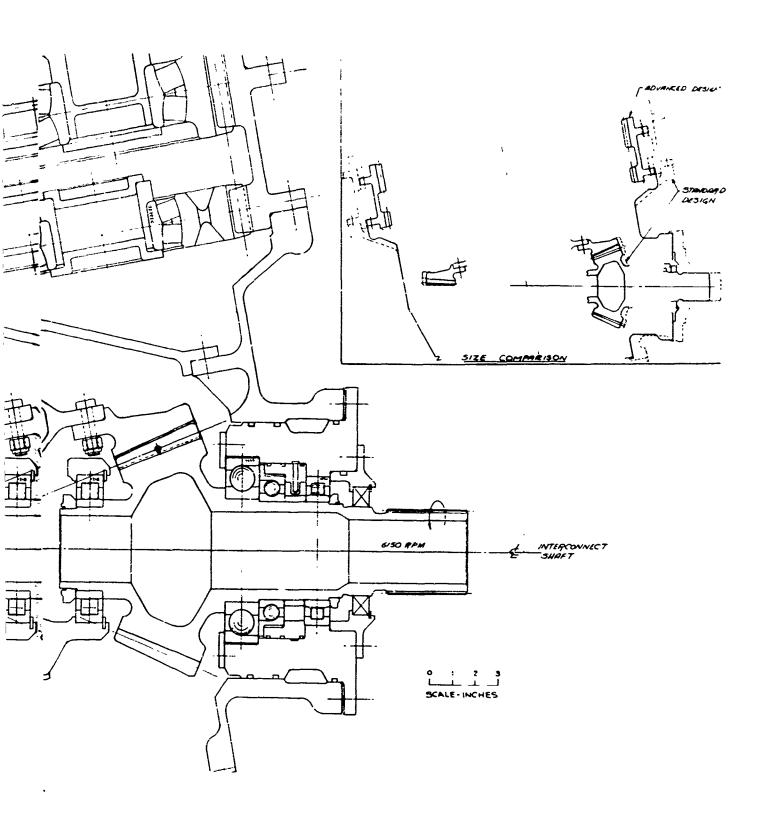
FORWARD ROTOR TRANSMISSION - ADVANCED STRESS LEVEL GEARS AND BEARINGS.
